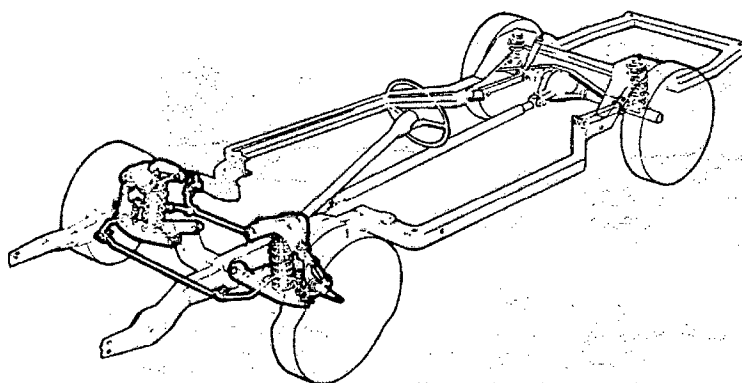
shows on most RWD cars, the rear axle assembly controls rear wheel camber and toe angles, the wheelbase and the crosswise position of the axle are controlled by the rear leaf springs or suspension control members. (Birch 1999)
